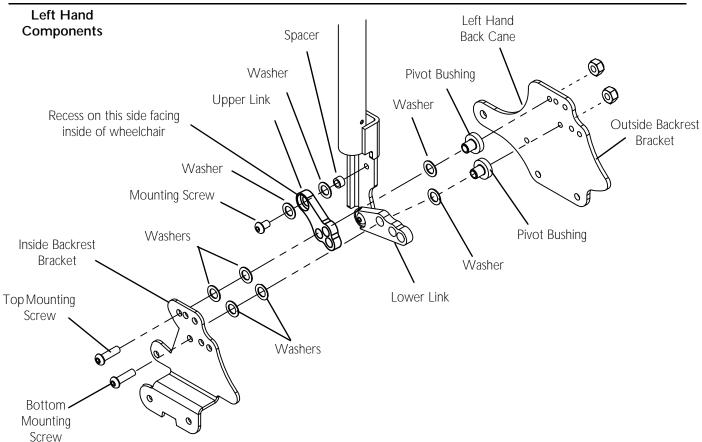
Correct Assembly for 2 inch Low Shear Recline
